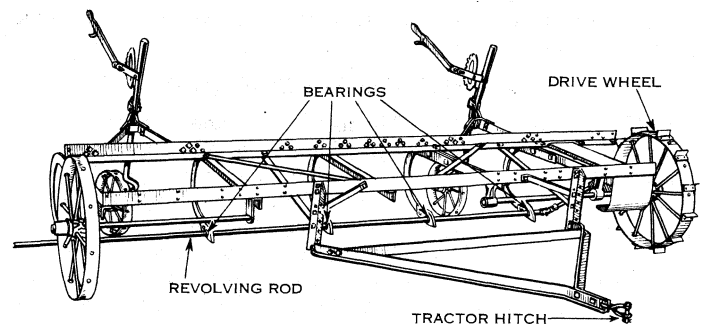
TRACTOR-DRAWN ROD WEEDER
